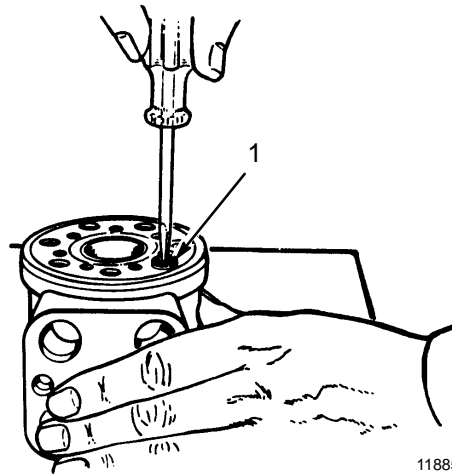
ASSEMBLY OF THE STEERING CONTROL UNIT (2 of 4)
